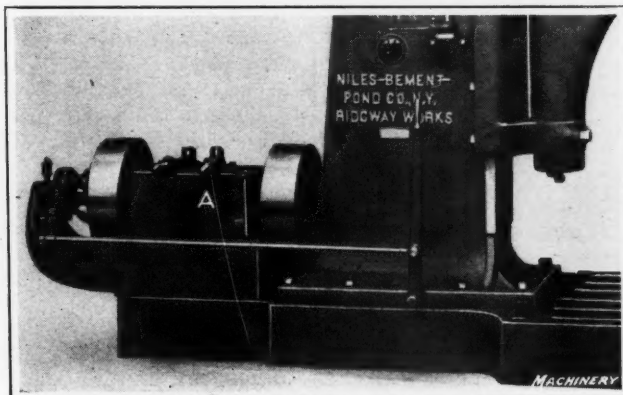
Four-speed 10-horsepower Speed-box attached to the Rear of a Radial Drilling Machine
